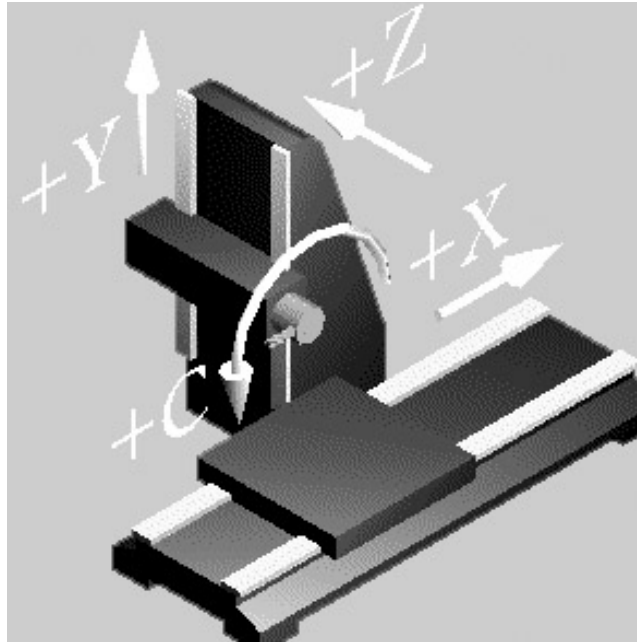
Example of the structure of a 3-axes milling machine [11]
